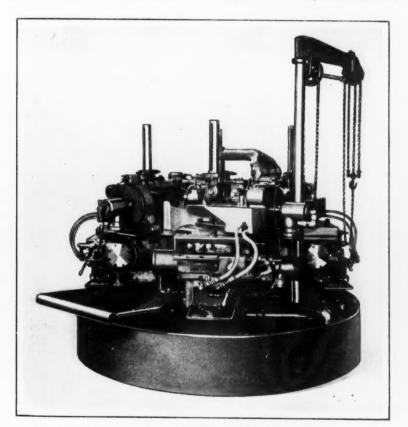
Gleason Automatic Gear-tooth Roughing Machine which Cuts Four Blanks Simultaneously
